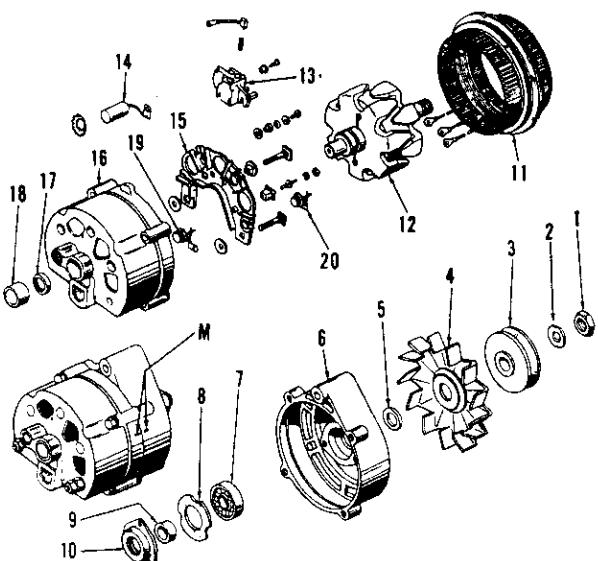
Exploded view of "DELCOTRON" alternator used on Series 444 and 2444.
